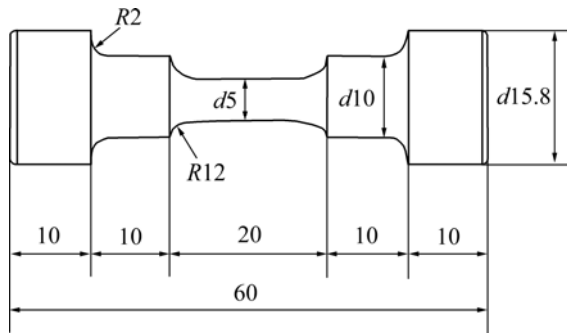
Shape and dimensions of specimen for axial tension–compression fatigue tests (Unit: mm)
